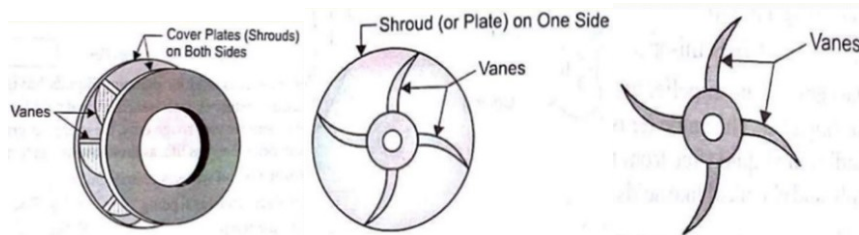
Closed impeller (left), Semi closed impeller (middle) and Open impeller (right)
